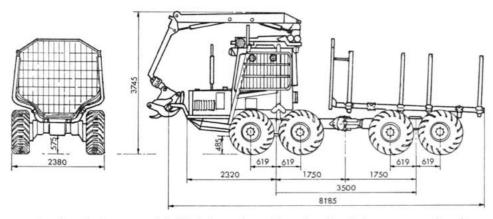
The Bruunett mini 578 F forwarder. Dimension sketch (measurements in mm)
